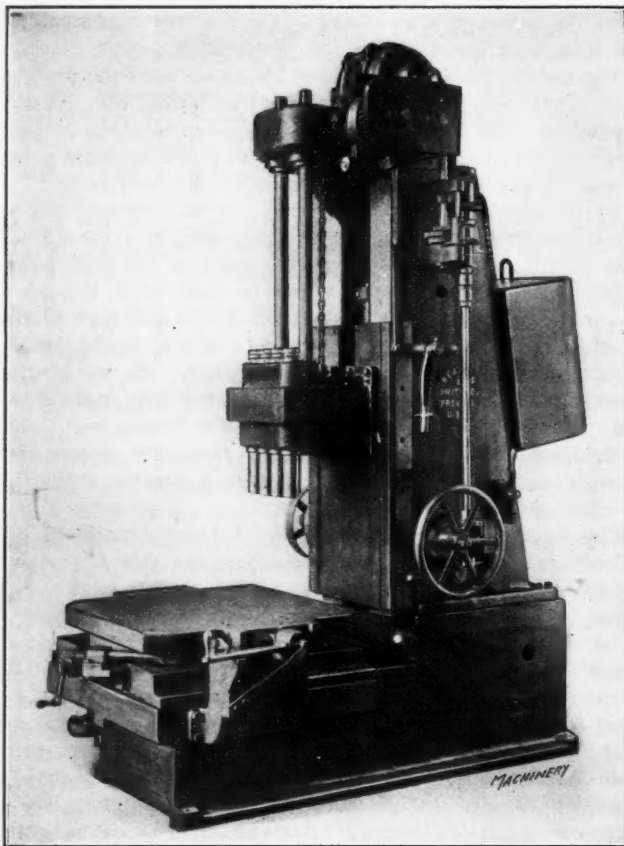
Beaman & Smith Cylinder Boring Machine used for boring and reaming Engine Cylinders
